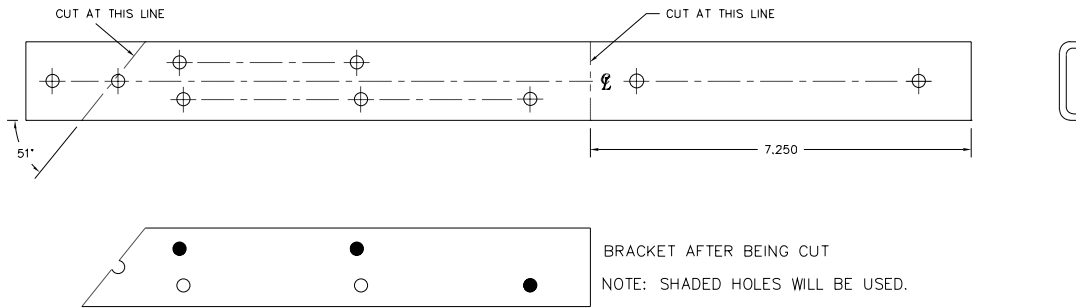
CUT REAR LEFT BRACKETS PER ABOVE DIMENSIONS
